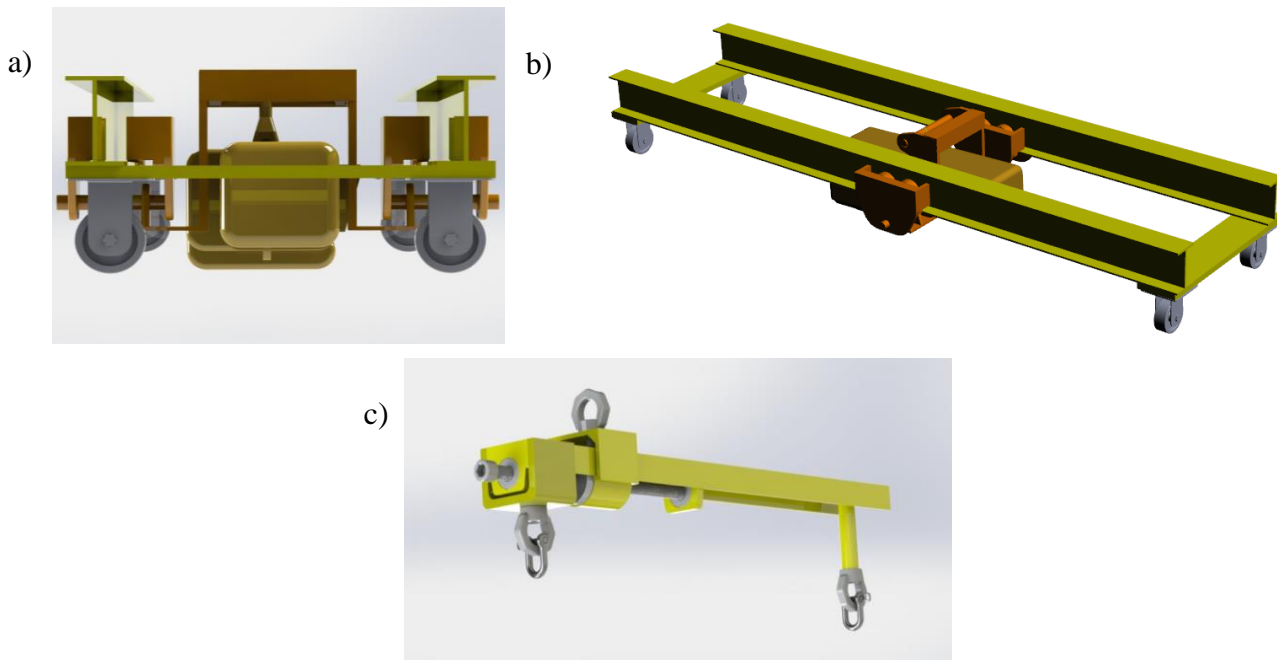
(a) Front view of the CAD drawing (left), (b) dynamic perspective showing the components of the trolley system (right), (c) dynamic view of lifting bar (bottom).
